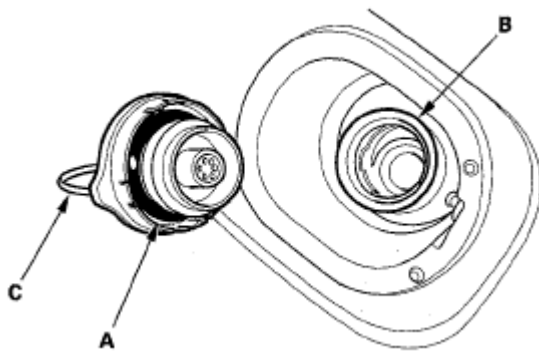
Identifying Fuel Fill Cap Seal And Fuel Fill Pipe Mating Surface
